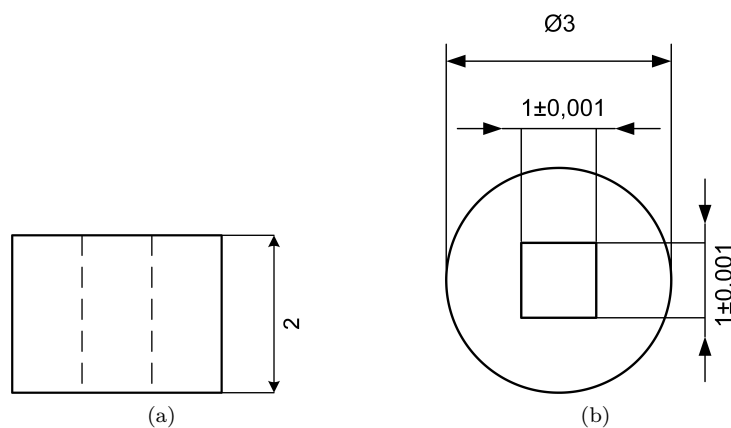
Technical drawing of EDM benchmark die geometry. Figure (a) is a side view and (b) is the test piece seen from the top.
